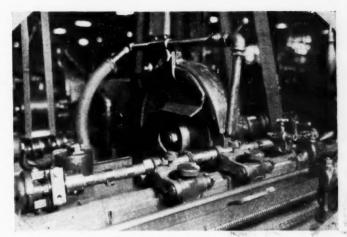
Grinding an automobile camshaft in Norton cam grinding machine
